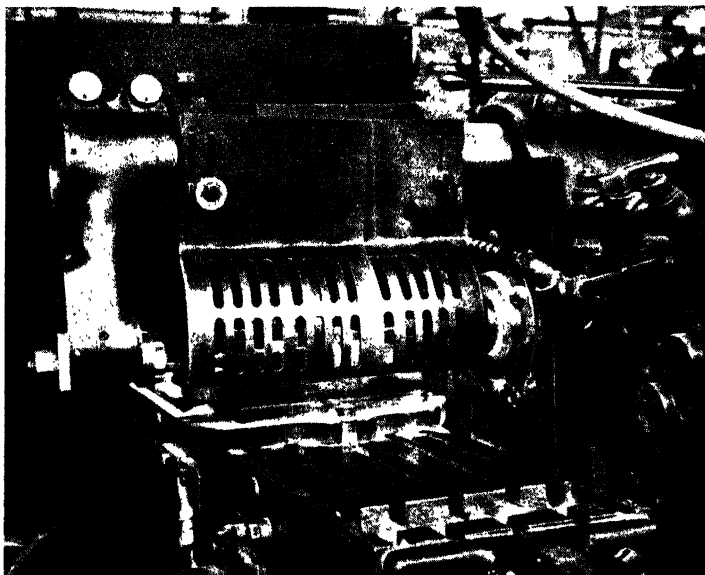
GUARD FOR MILLING MACHINE CUTTERS
